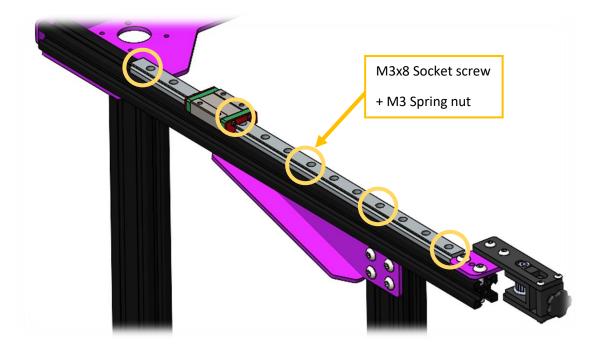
Left side, fix rails with M3x8 Screws + M3 Spring nuts were indicated with circles.
